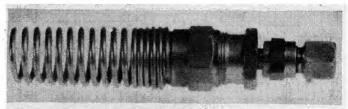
This coupling, for 14-inch air hose, is equipped with a spring guard that helps reduce hose breakage near the coupling.
